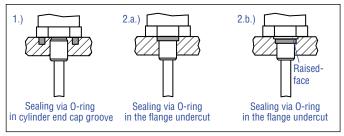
Possibilities of sealing for threaded flange standard 1. + 2.a. (RH5-J/M/S) and for threaded flange with raised-face 2.b. (RH5-T)
